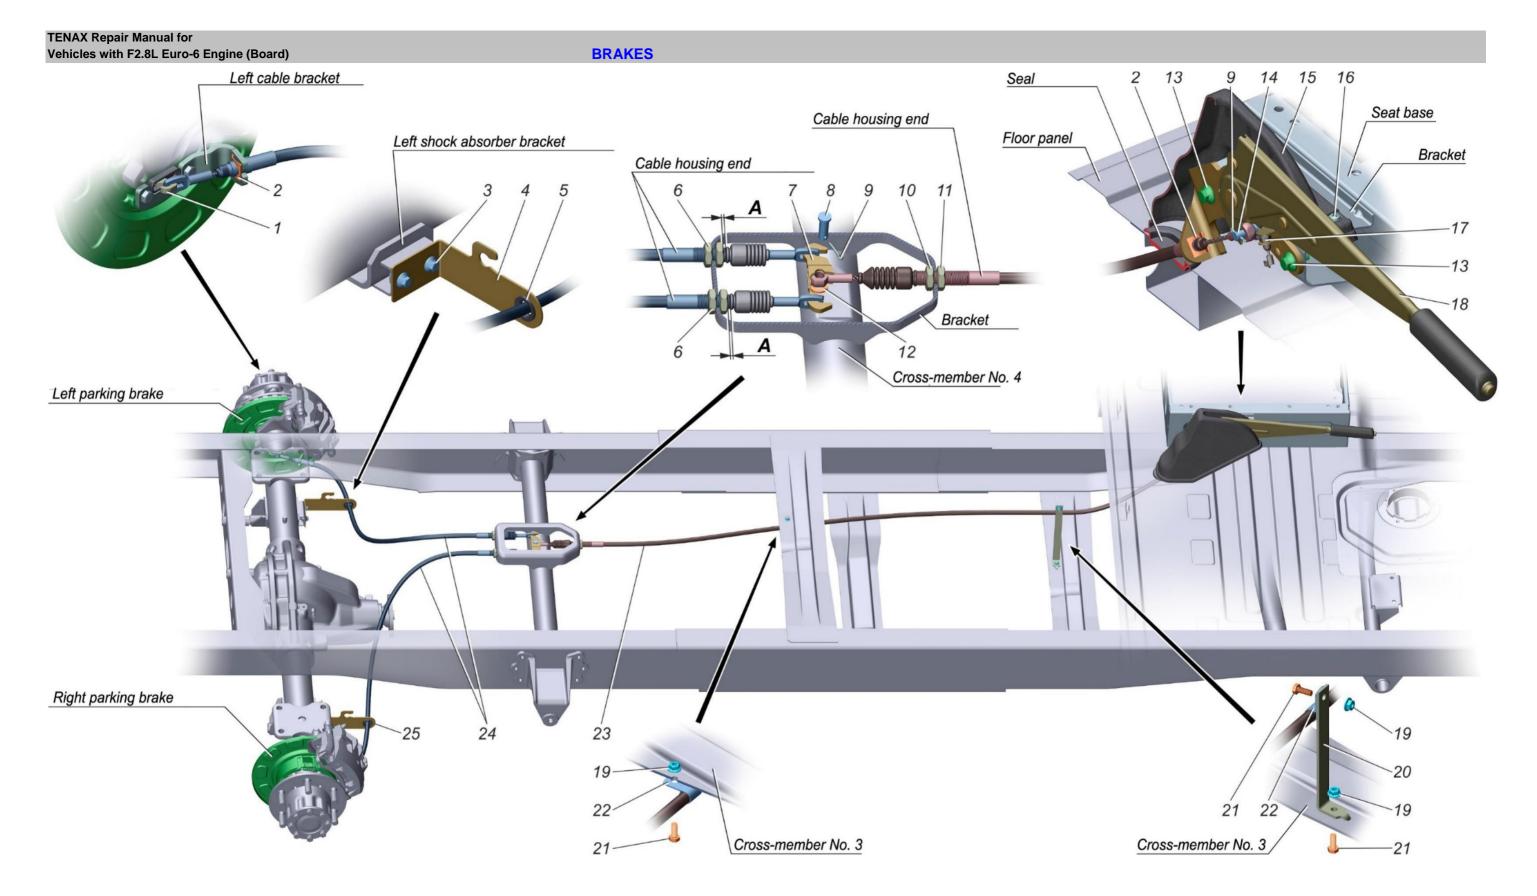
Parking brake system: dimension A corresponds to 1-2 threads; 1 - drive arm; 2, 22 - cable fastening clips; 3, 13, 21 - bolts; 4 - left cable housing bracket; 5 - bushing; 6, 10, 11, 19 - nuts; 7 - equalizer; 8, 14 - pins; 9 - cotter pin; 12 - washer; 15 - casing; 16 - special screw; 17 - hand brake indicator light switch; 18 – parking brake lever; 20 - cable housing support; 23 - front cable; 24 - rear cables; 25 - right cable housing bracket
